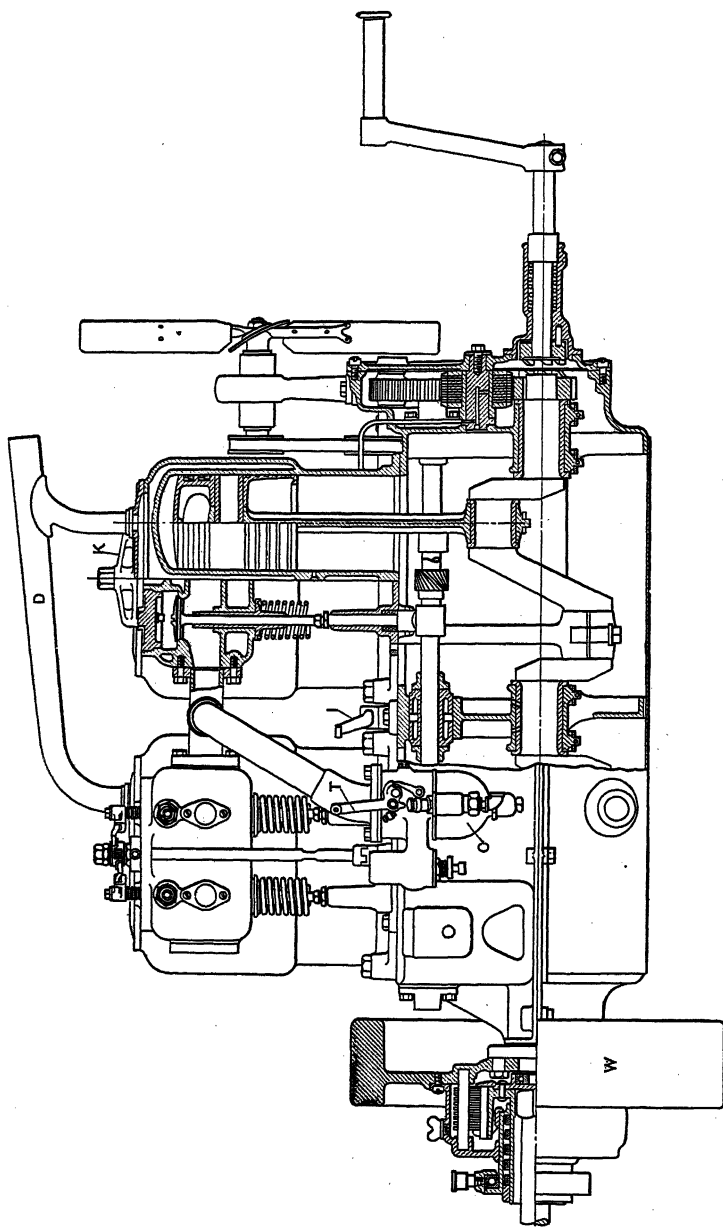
Automobile Engine. Elevation and Longitudinal Section.
